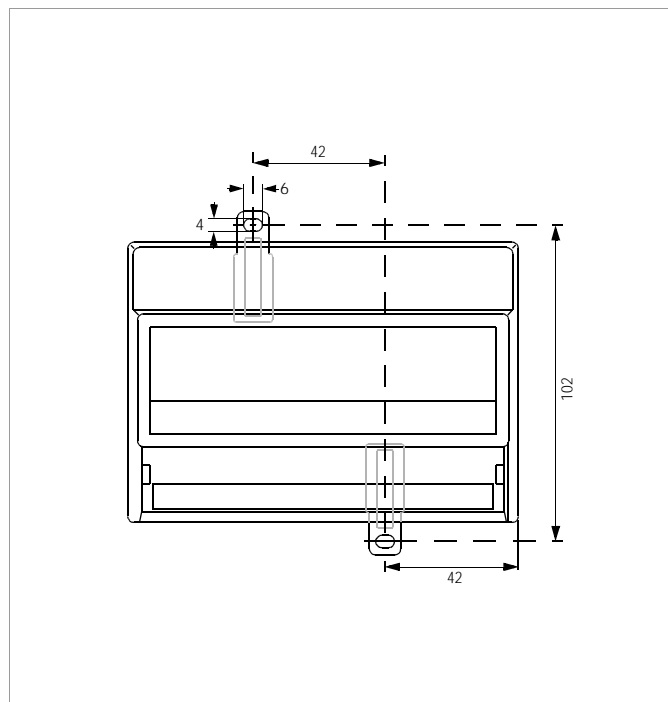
Dimensional Drawing for Wall Mounting (front view)
